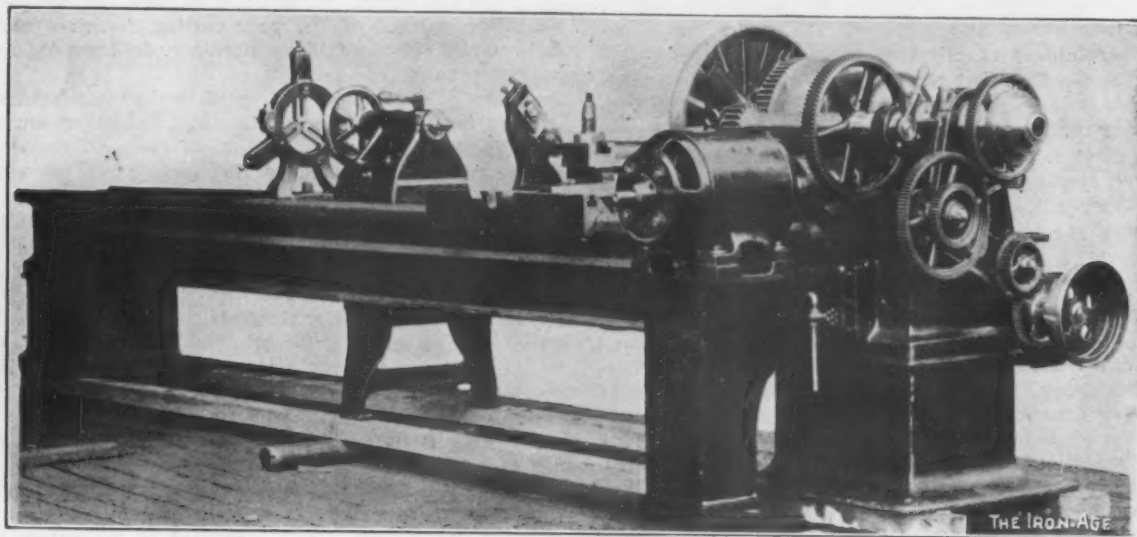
American Tool Works Company's 42-Inch Motor-Driven Triple-Gear Lathe.
